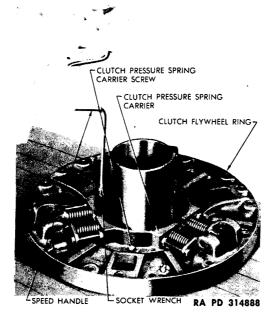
Removing Pressure Spring Carrier Cap Screws
